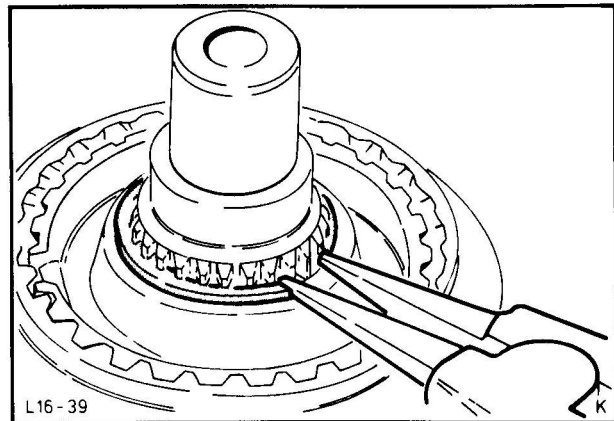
Remove circlip from 3rd/4th gear synchroniser hub
